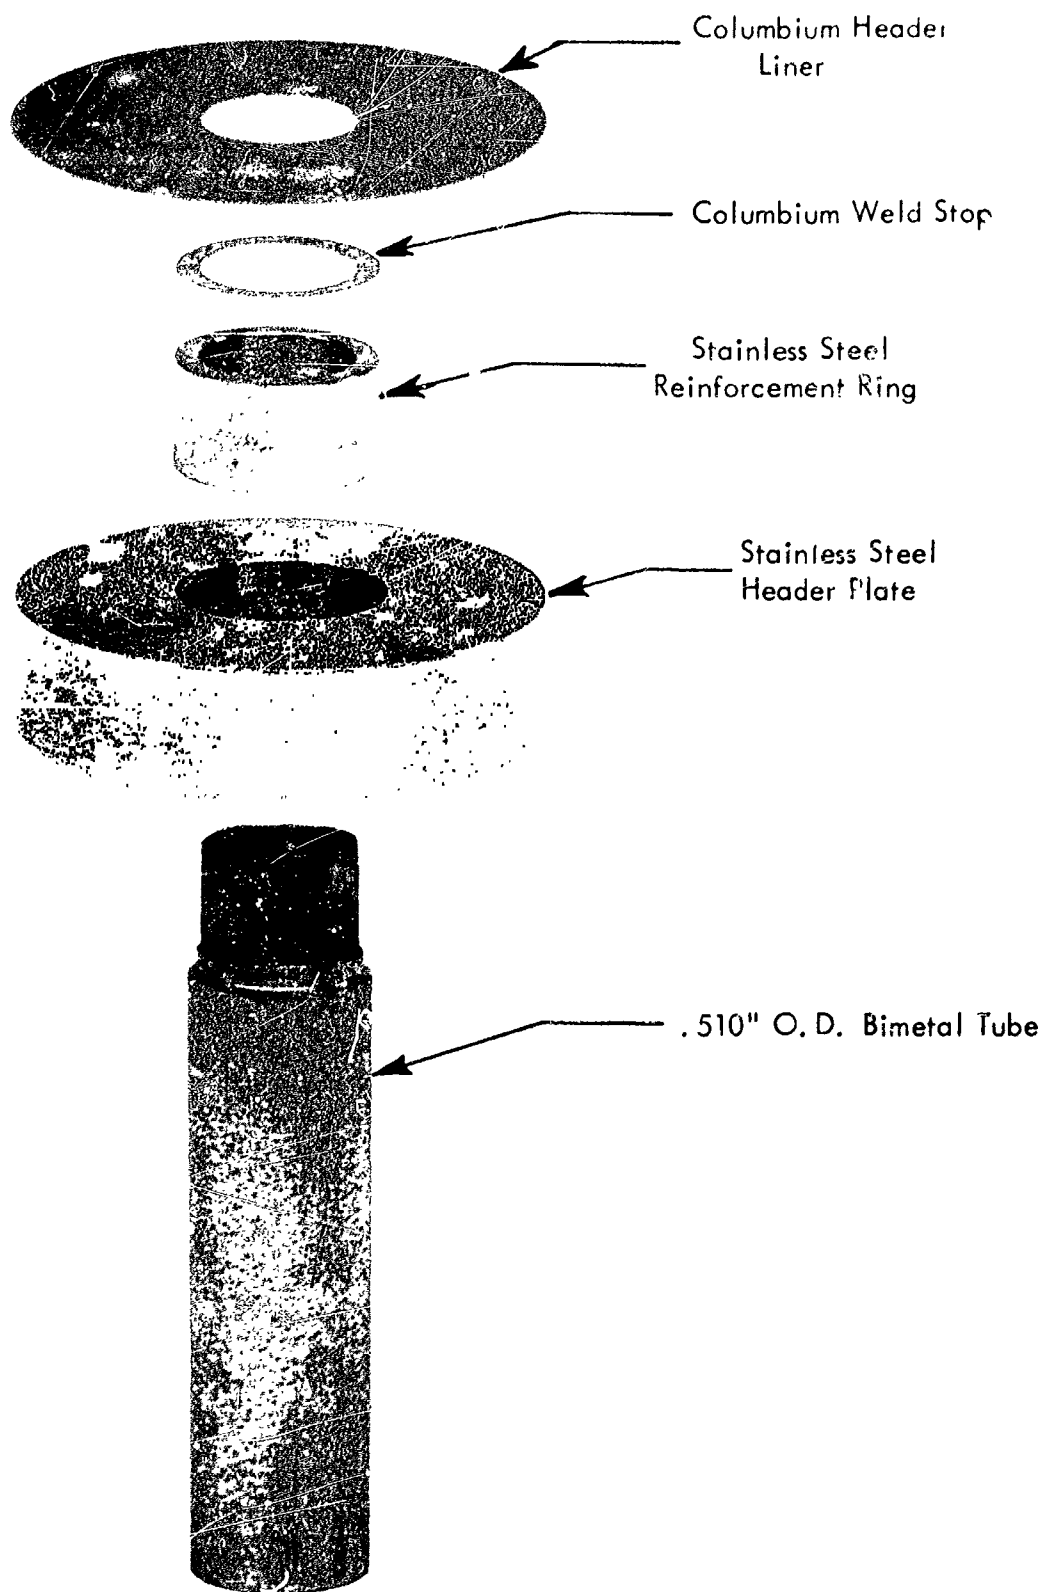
Reference Design Tube-To-Header Joint - Assembly View
